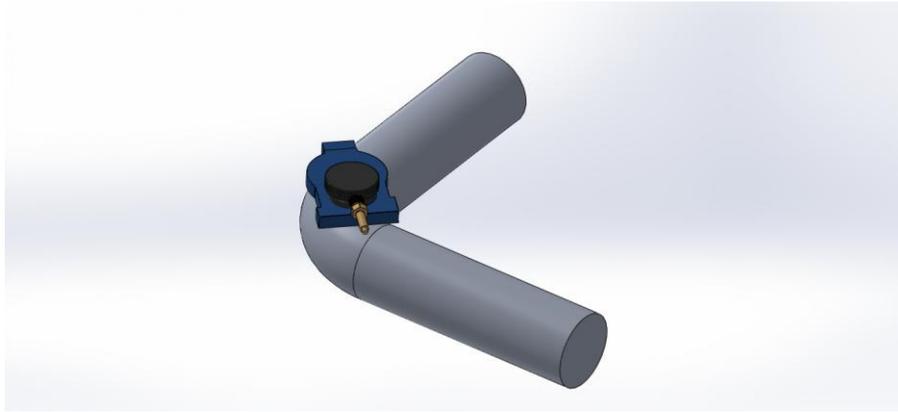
Ultrasonic sensor around the bending pipe (side view)
